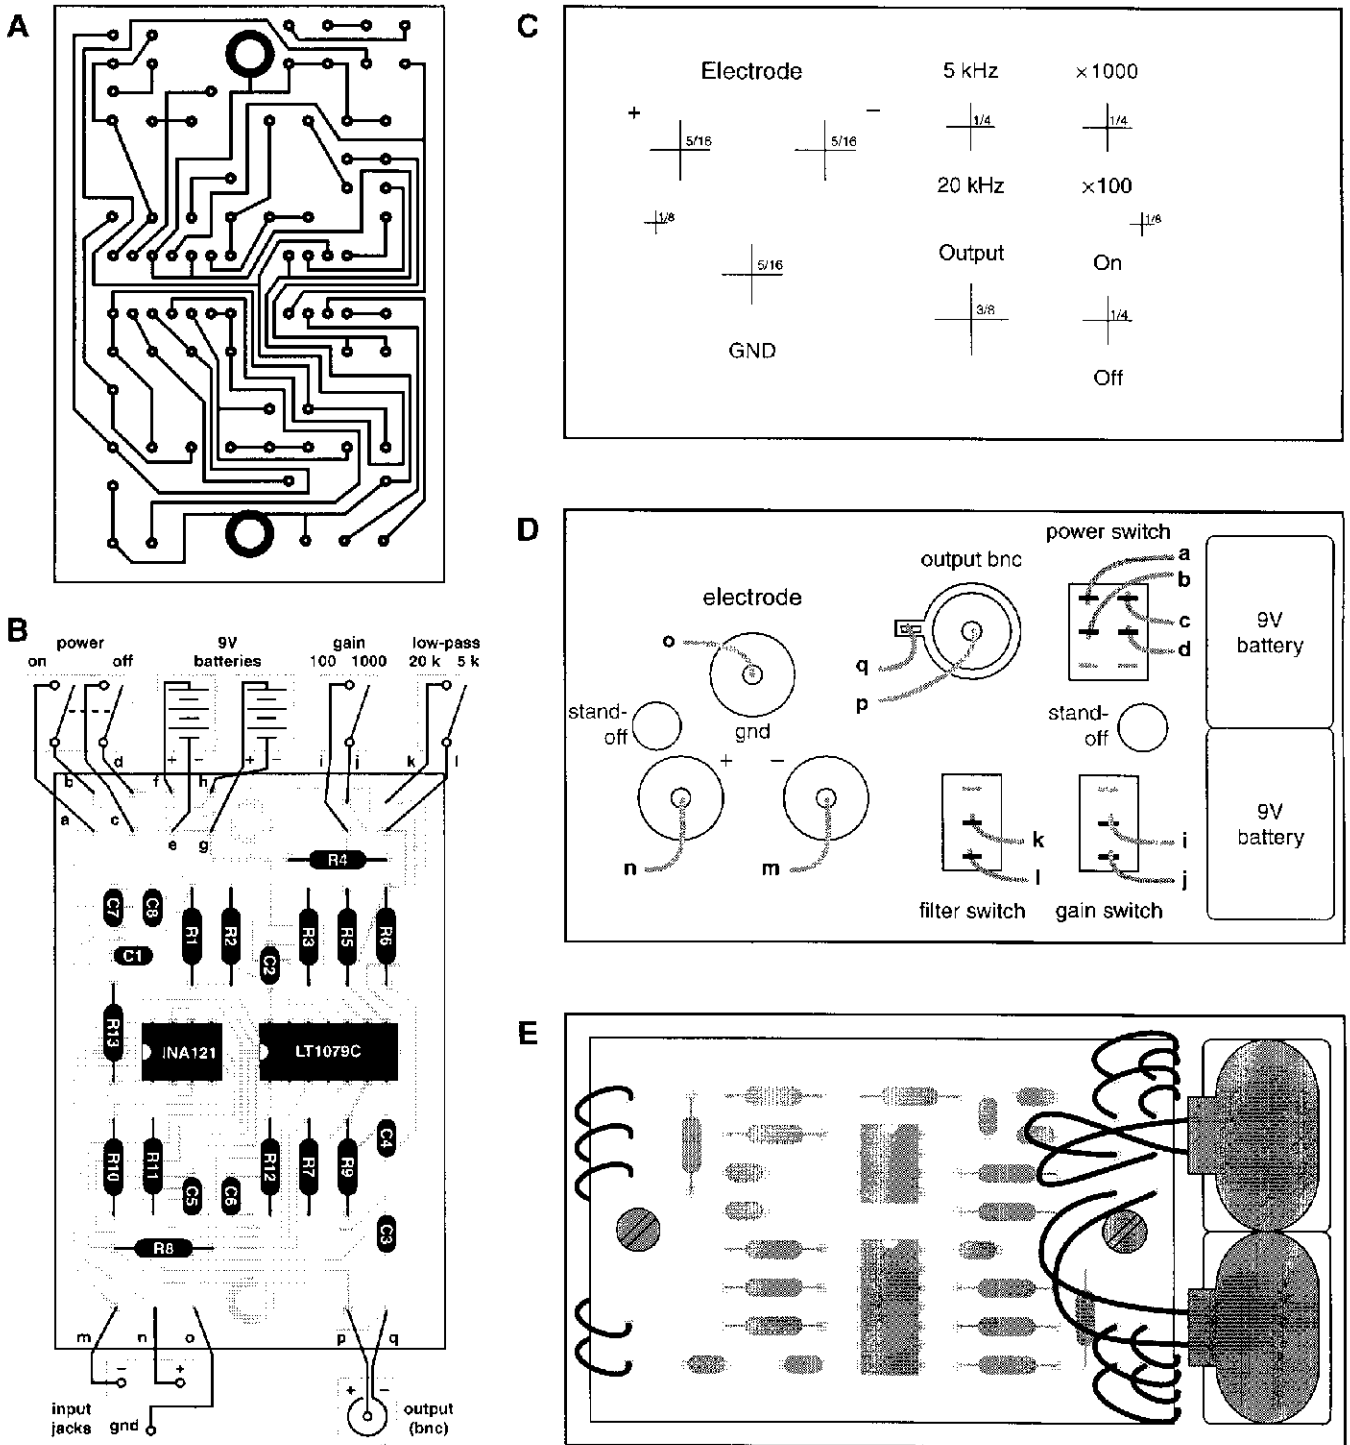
Amplifier construction: (A) Printed-circuit board, showing lines of copper. (B) Reverse side of the board, showing layout of components and wiring of switches, connectors, and batteries. Where the two ICs appear, use sockets rather than soldering the ICs directly onto the board. A switch for the low-pass filter is included in this circuit, bridging the points marked * in Fig. 1. If a fixed low-pass of 5 kHz is desired, omit the switch and make no connections to points k and l. (C) Layout of switches and jacks on the enclosure, as viewed from the outside. Crosses indicate locations of holes, fractions are the hole diameters in inches. (D) Layout and connection of switches and jacks, as viewed from the inside of the enclosure. Letters beside wires match letters shown in (B). (E) Completed amplifier, with connections made, ICs in their sockets, and batteries in place. All figures shown actual size.
